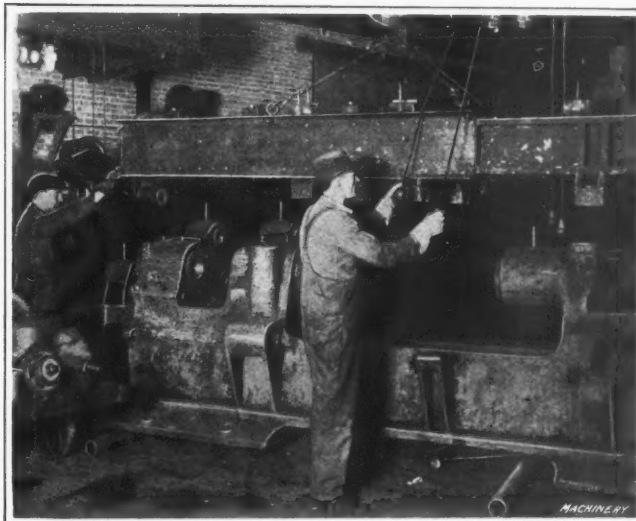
Lowering Assembling Jig into Place on Casting. Note Bearings on Under Side of Jig for bringing Lathe Bearings and Ways into Alignment
